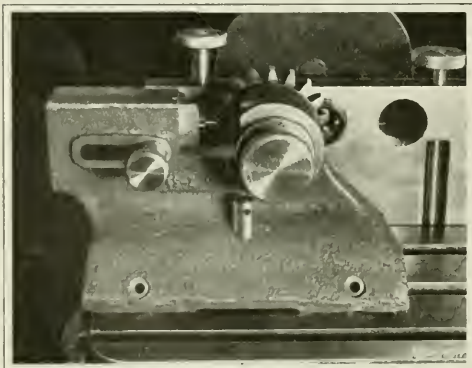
Front View of Fixture used for projecting Spur Gears or Gear Shaper Cutters
